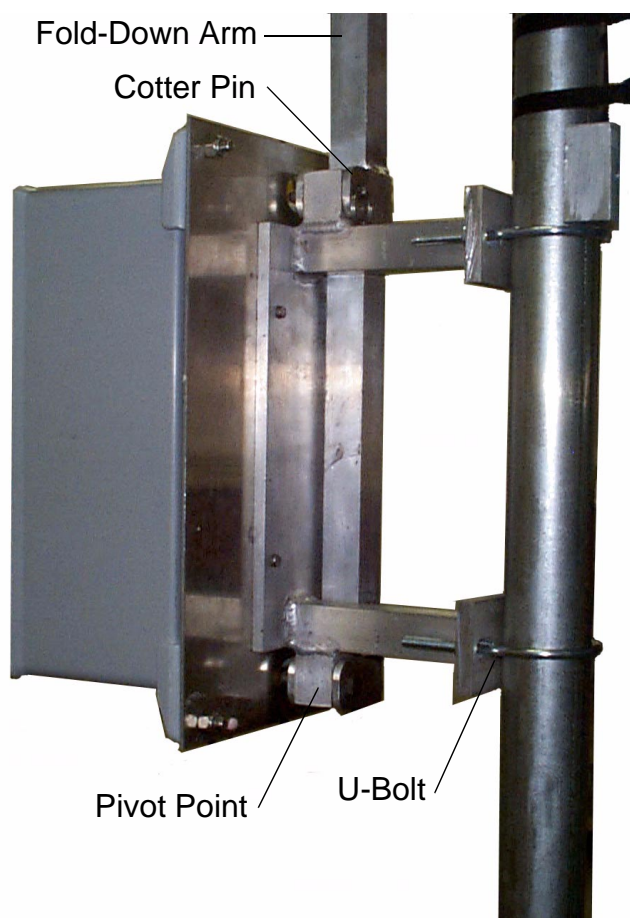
GSOS Mounting Assembly and Fold-Down Arm
